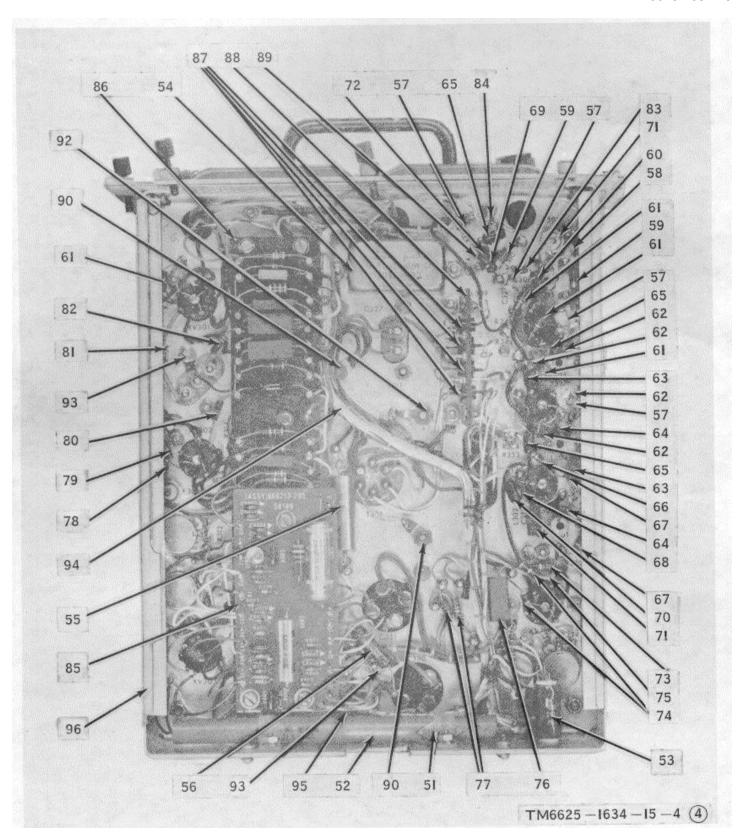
(4). Electrical equipment chassis (sheet 4 of 4).
